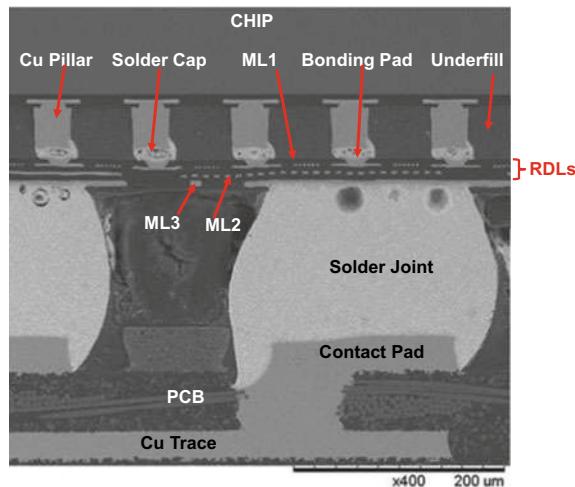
Cross section image showing the chip-to-RDL-substrate bonding, solder ball mounting, and then SMT reflow on a PCB
